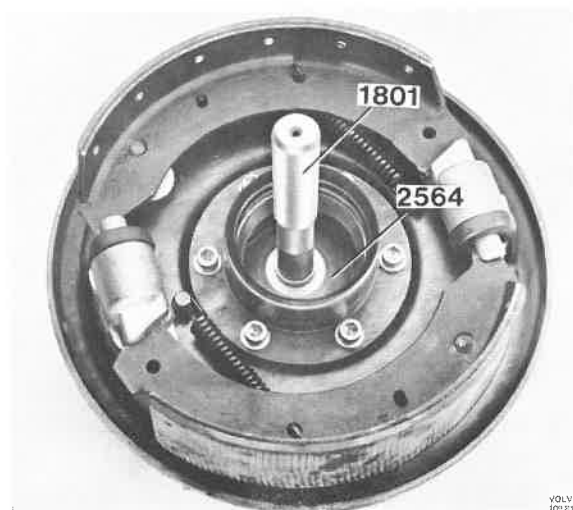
Removing the inner bearing outer ring and inner sealing ring
